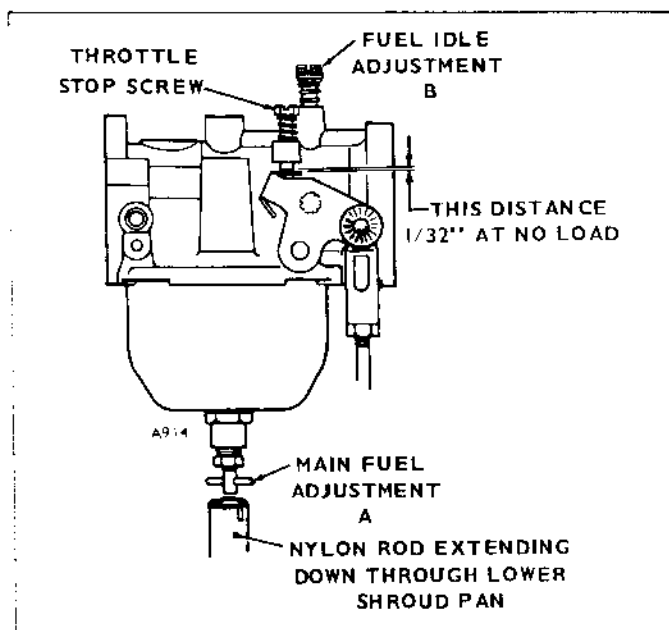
Throttle Stop Screw Adjustment (Spec B and later)
